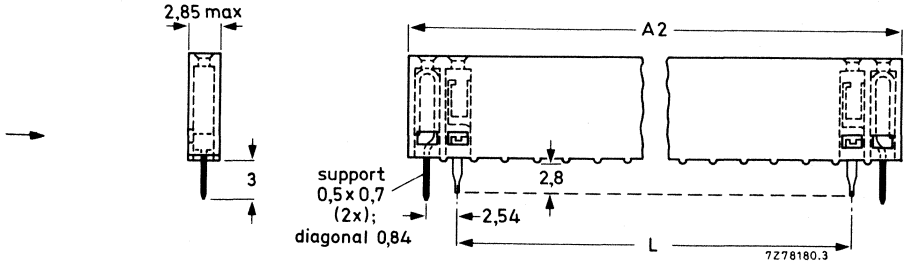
Panel socket, single row. Dimensions are identical with those in Fig. 5 except as shown. See Table 2 for dimensions A2 and L.
